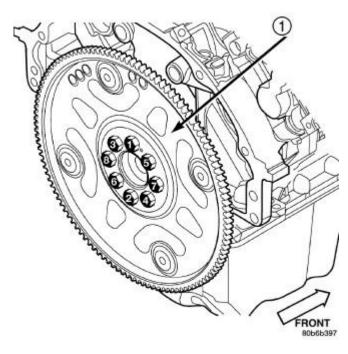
Flexplate Tightening Sequence Courtesy of CHRYSLER LLC
